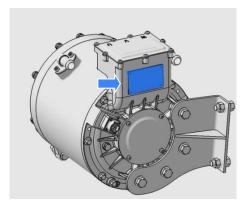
TZ220XS030D1SG drive motor model and manufacture number
